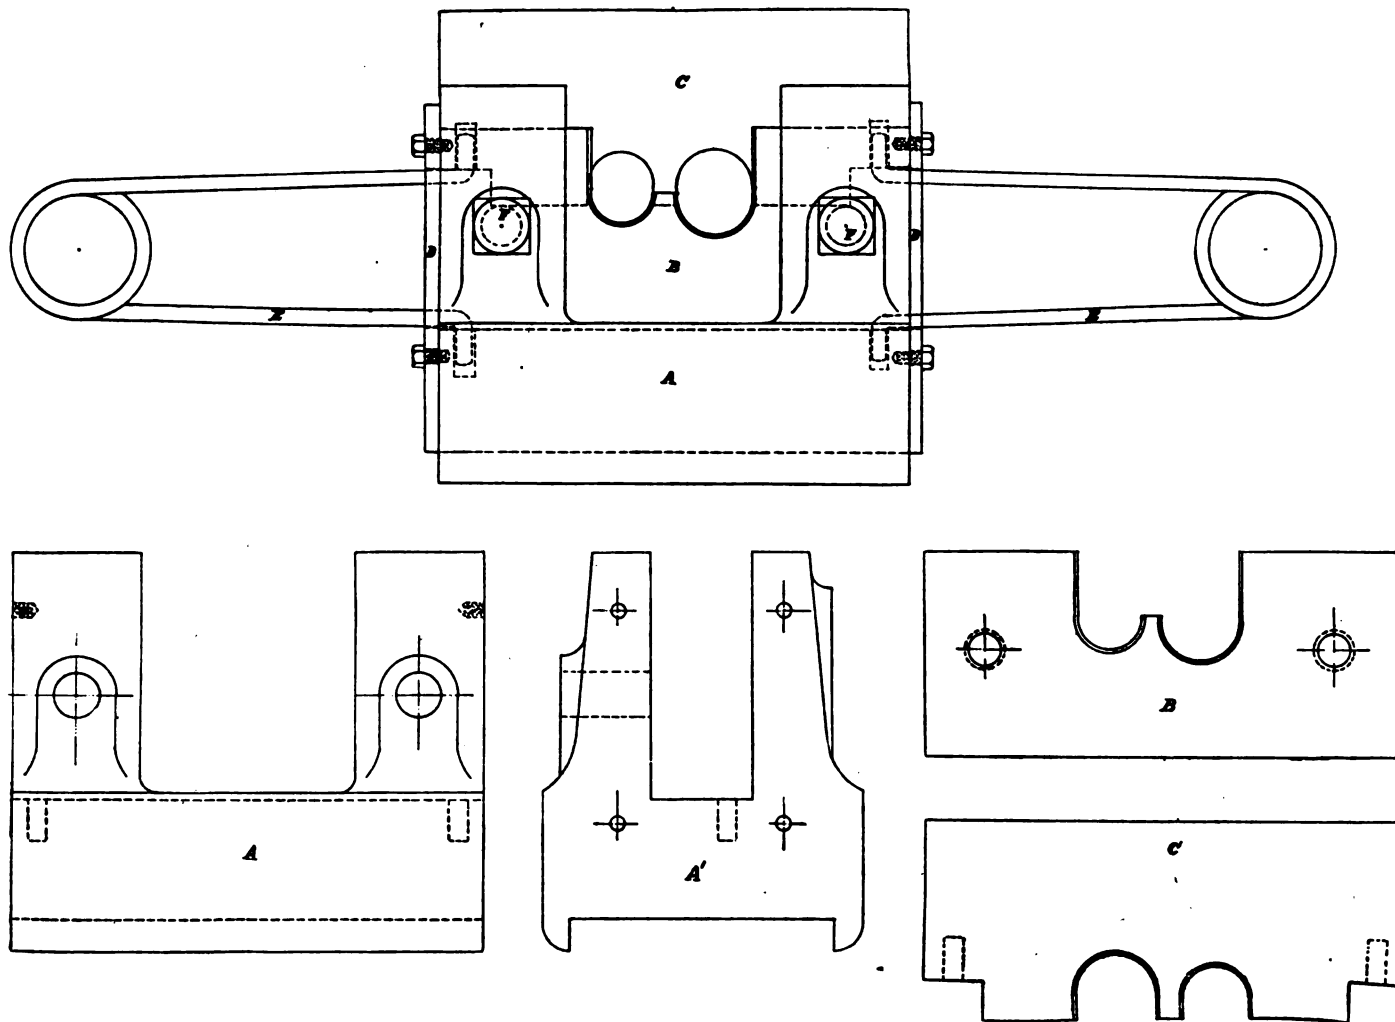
UPPER VIEW IS A SIDE ELEVATION OF COMPLETE SHEAR. LOWER VIEWS ARE DETAILS OF PARTS.
